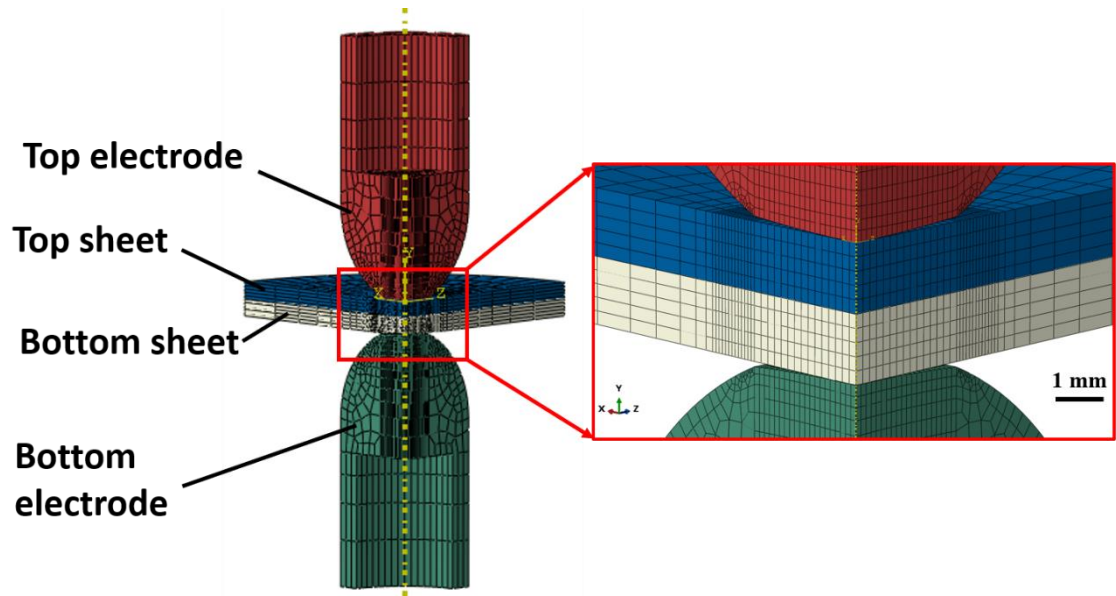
Geometry and mesh of the quarter process model for resistance spot welding of Usibor 1500 steel sheets.
